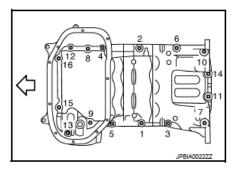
Oil Pan Mounting Bolts Loosening Sequence (Lower) Courtesy of NISSAN MOTOR CO., U.S.A.
